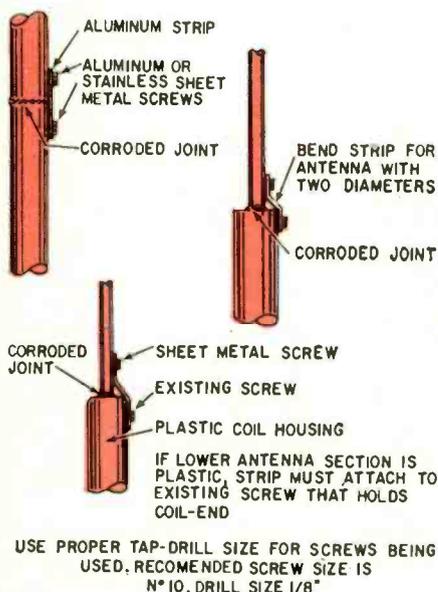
Corroded antenna section joints that can't be separated for cleaning can be bypassed electrically with strip of metal. Be sure aluminum strip touches only other aluminum parts (except for stainless steel screws); otherwise—corrosion!
